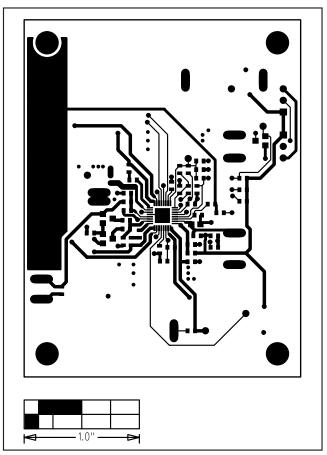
MAX17020 EV Kit PCB Layout—Solder Side
